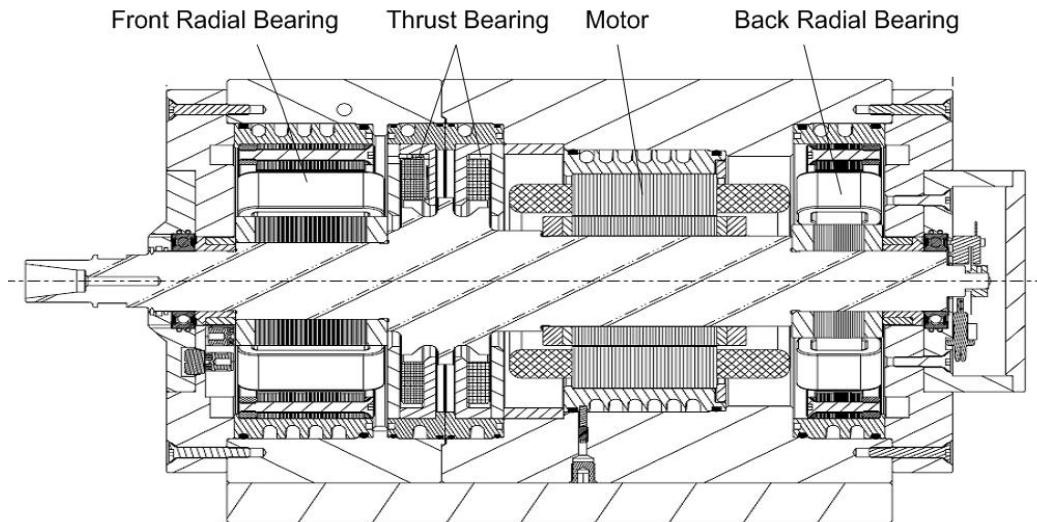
High-speed machining spindle supported on active magnetic bearings
